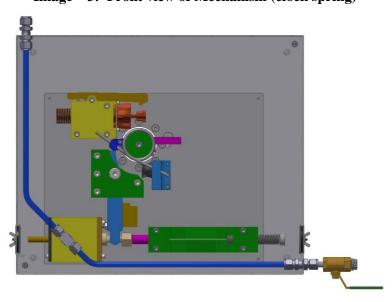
(Alternate): Front view of Mechanism (torsion spring)
